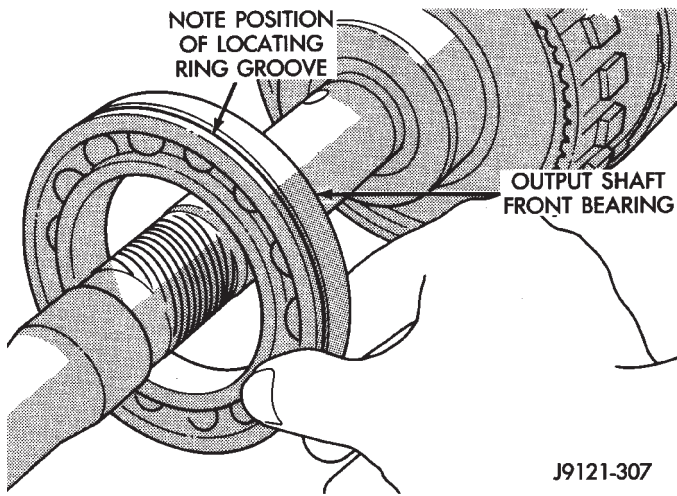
Output Shaft Front Bearing Removal/ Installation
